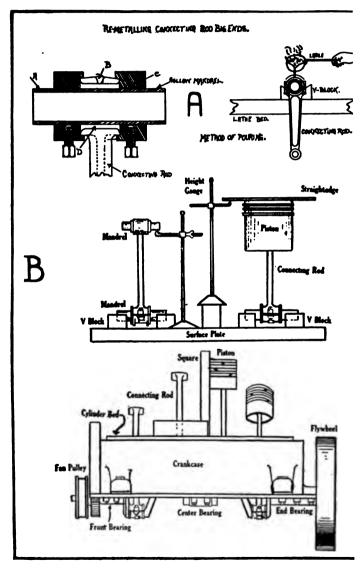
Showing Simple Method of Remetalling Connecting Exings at A, and Ways of Measuring Parallelism of Upper am Connecting Rod Bearings at B and C.
